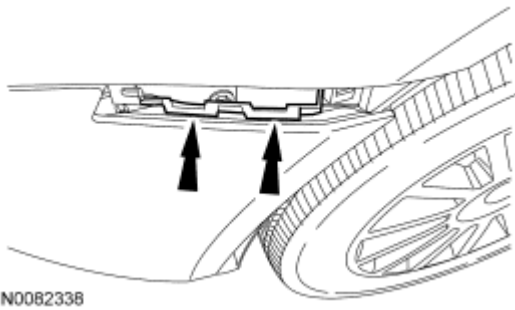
Locating Tabs On Bumper Cover Mounting Bracket
